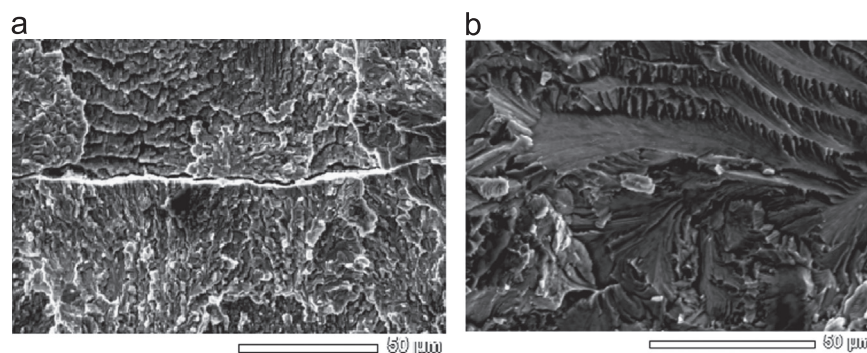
The fractography of the welds broken at Ti/MZ interface performed with beam offset of 0.25 mm and different welding speeds: 1.8 m/min (a) and 1 m/min (b) (MZ side).
